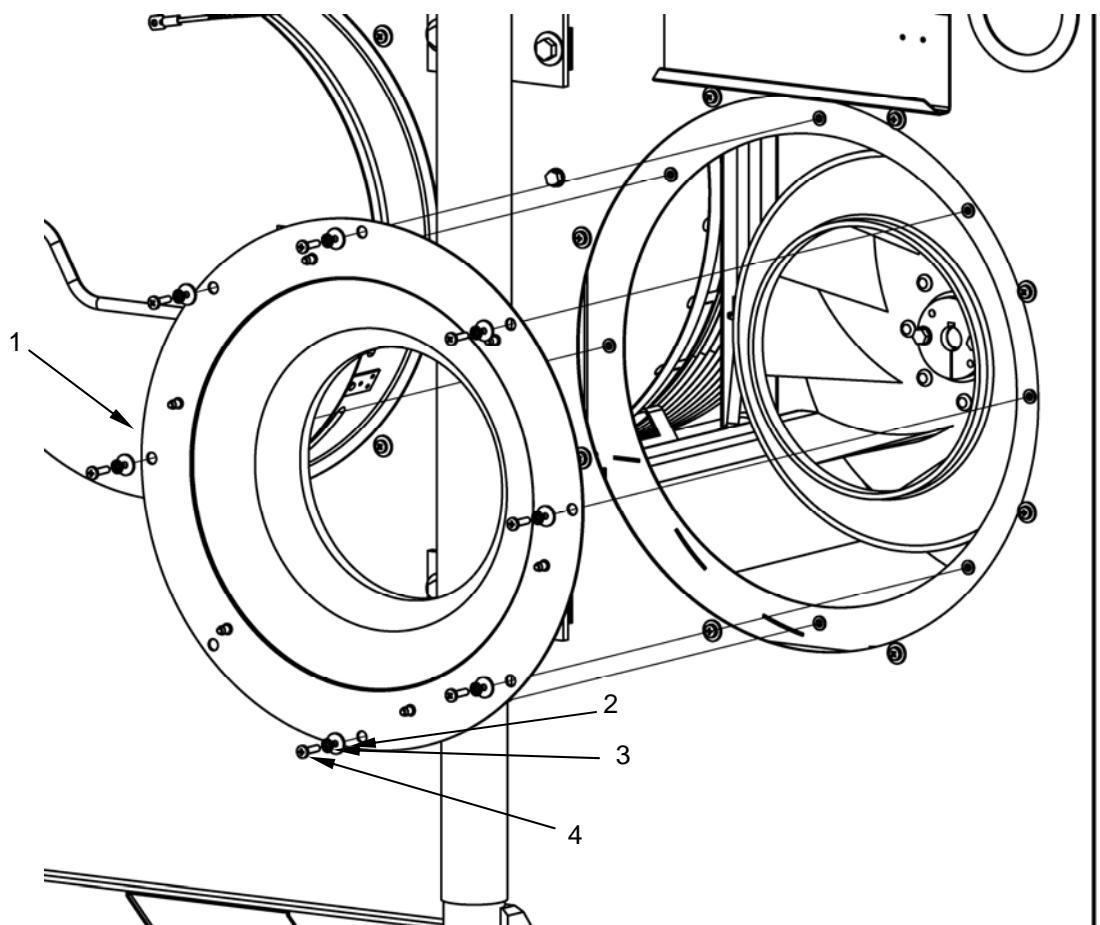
Assembly, Inlet Fan (Sheet 1 of 3).
